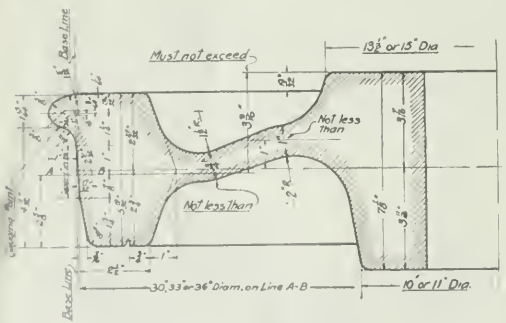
in., 33 in. and 36 in. Steel Engine Truck Wheels.
